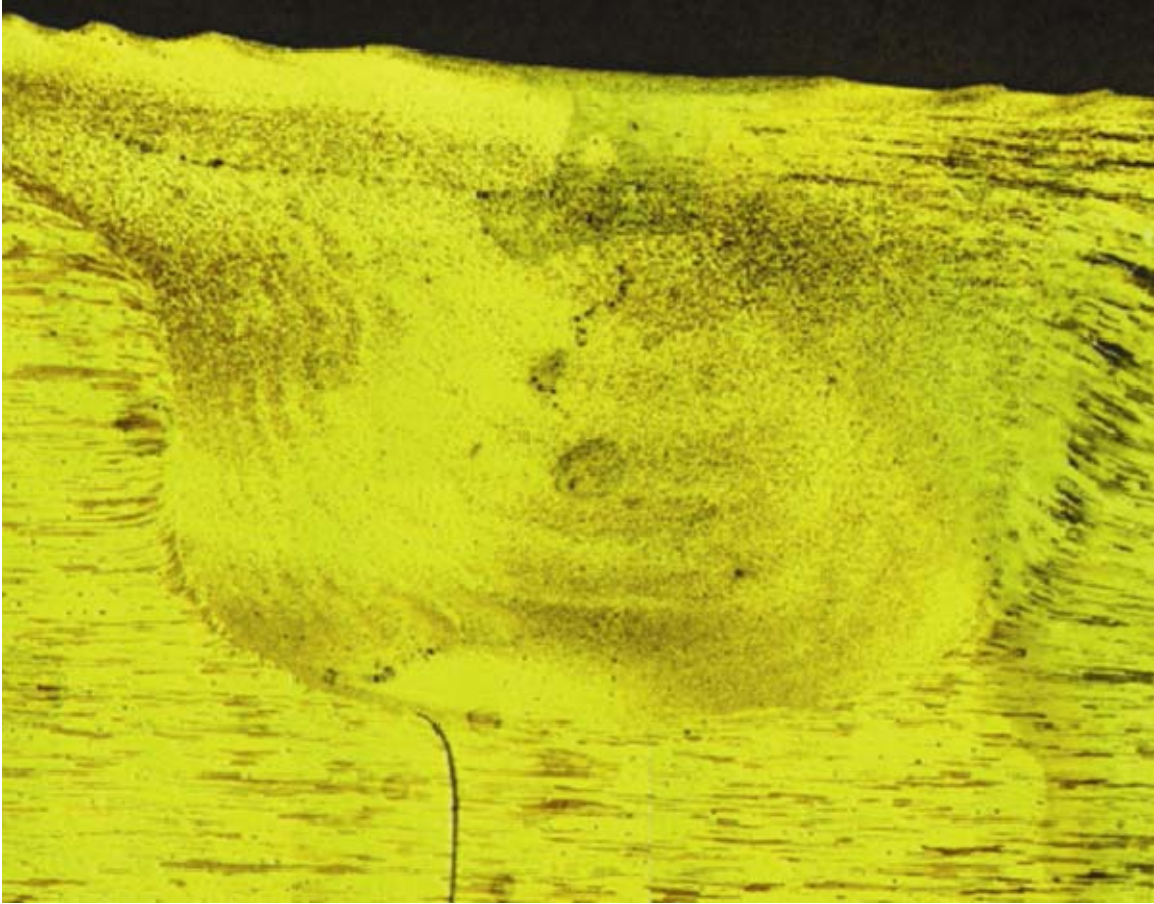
Anodized to unanodized, weld location on the advancing side with a standard tool. (sample 1106)
